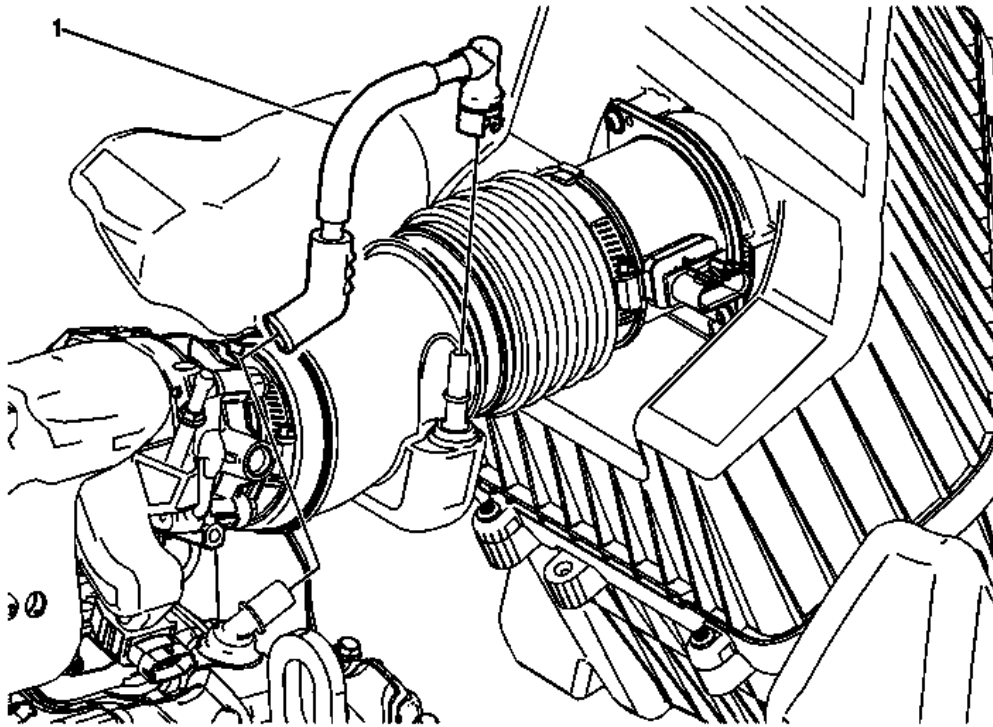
Identifying Front Positive Crankcase Ventilation Tube
